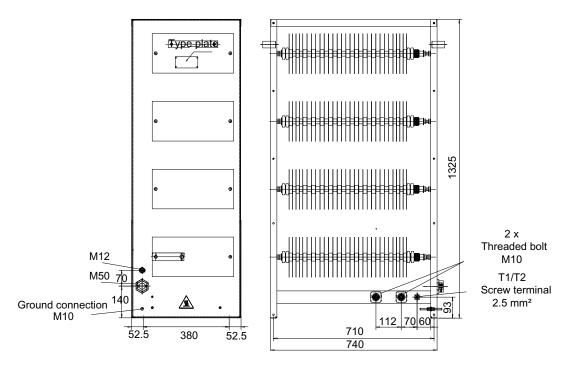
Dimensions of the braking resistor FSGX, order-no. 6SL3000-1BE32-5AA0
